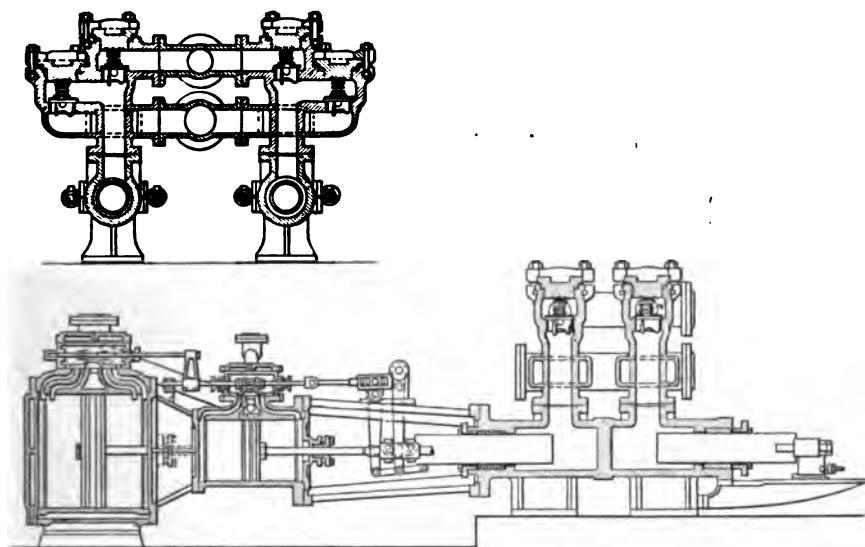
Transverse and longitudinal sections of a duplex, double-acting, steam-driven, station pump. (Prescott Steam Pump Co.)
